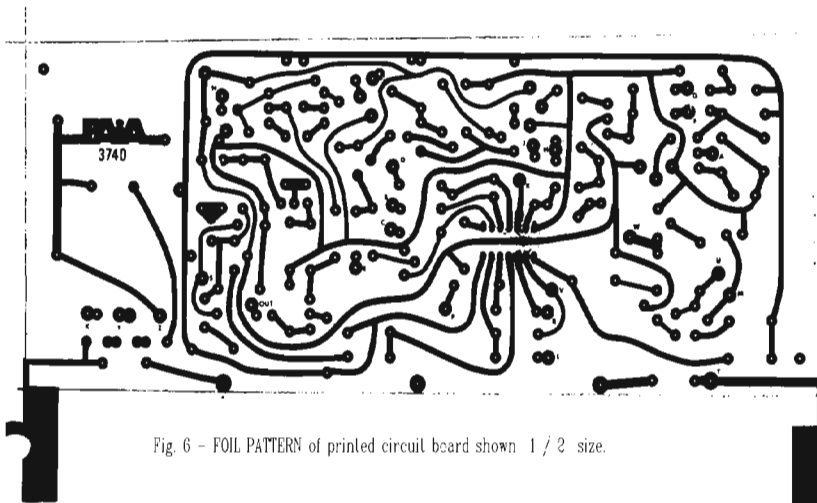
FOIL PATTERN of printed circuit board shown 1/2 size.
